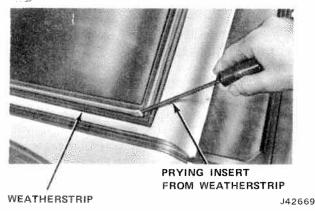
Removing Windshield Moulding Insert from Weatherstrip
